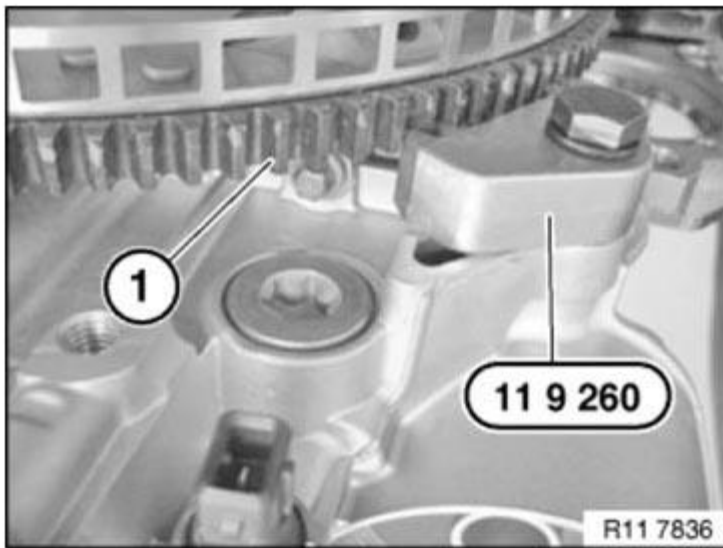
Securing Flywheel With Special Tool 11 9 260
